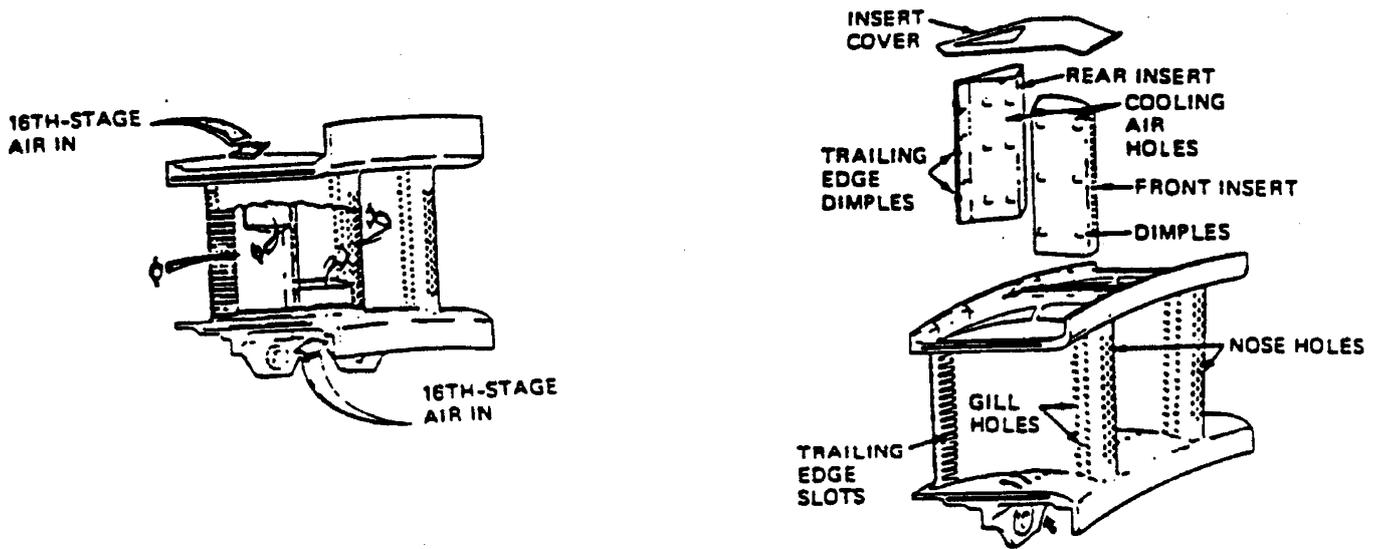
Impingement Cooled, Nozzle Guide Vanes also showing Platform and Nozzle Film Cooling.
